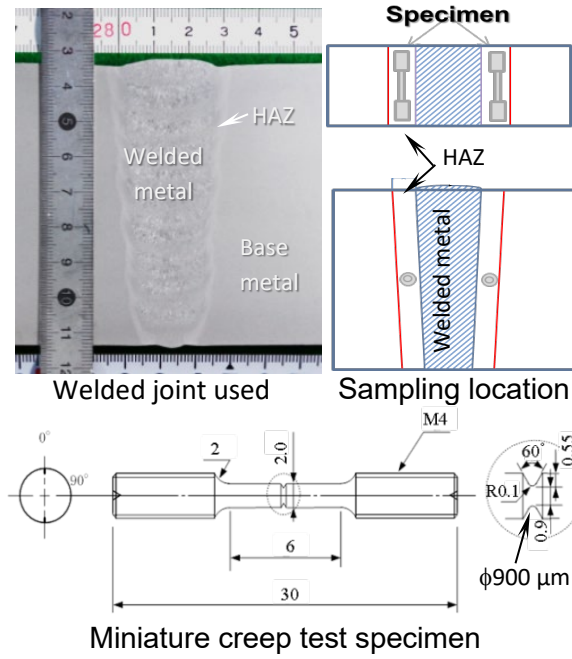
Miniature creep test specimen and its location for specimen sampling in a welded joint.
